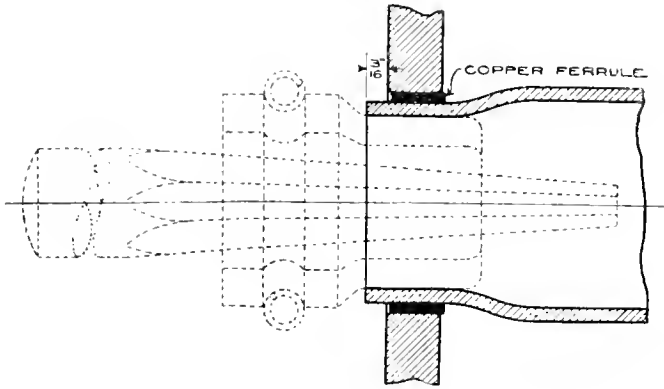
Tightening Flues in Back Flue Sheet With Straight Sectional Expander.
